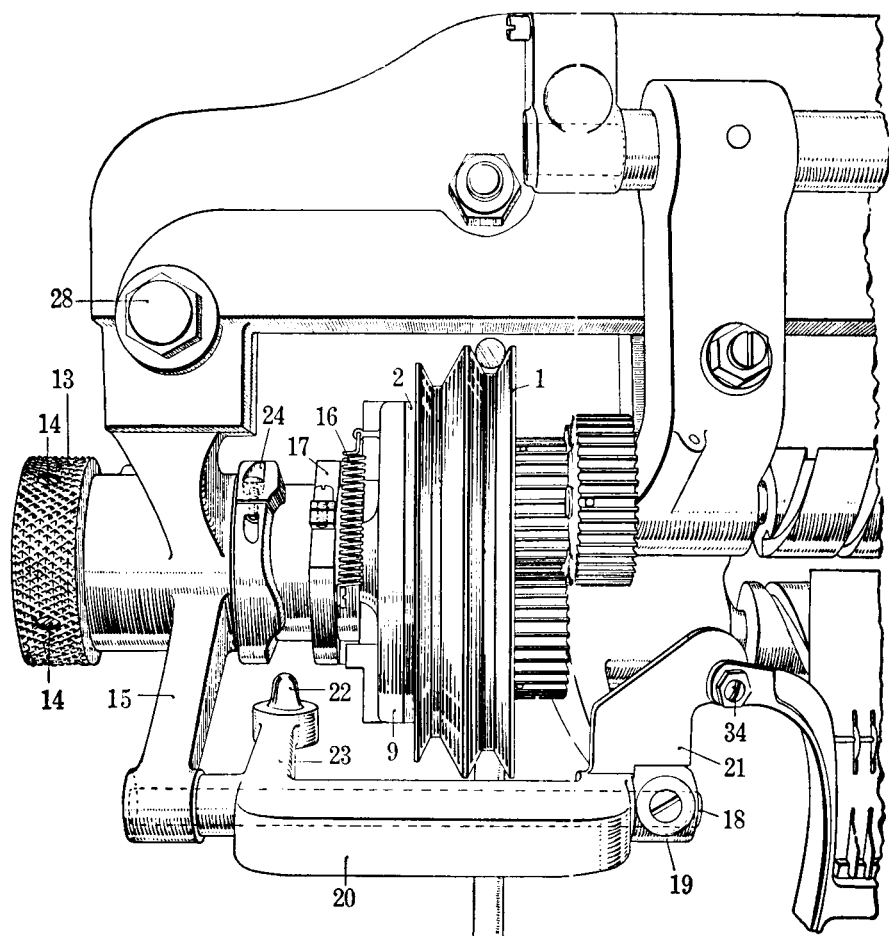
Showing in detail the mechanism for throwing out the distributor clutch when the channel entrance is opened.
